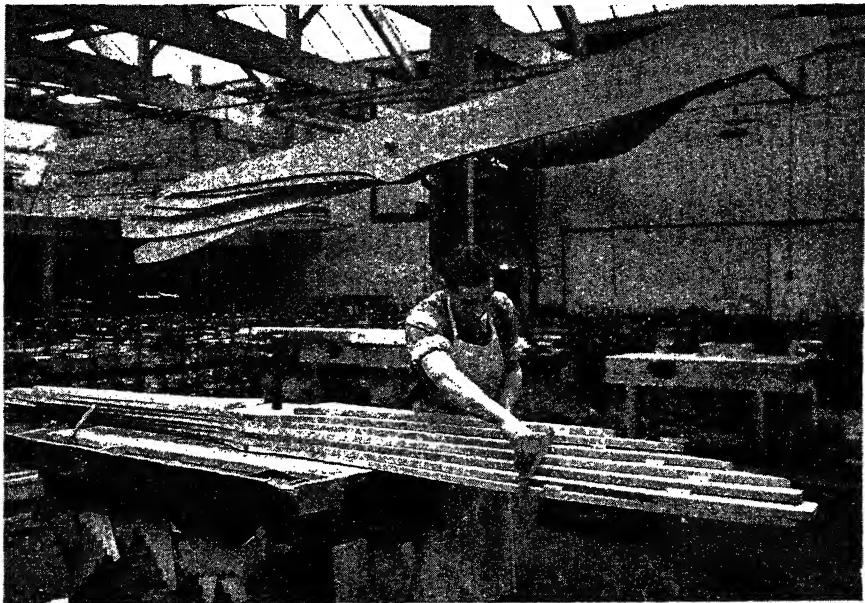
ASSEMBLING THE LAMINÆ FOR CONSTRUCTING AN AIRSCREW.
